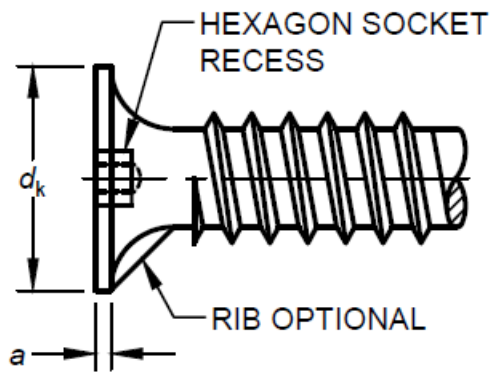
(B) HEXAGON SOCKET BUGLE HEADS (STYLE 1)
